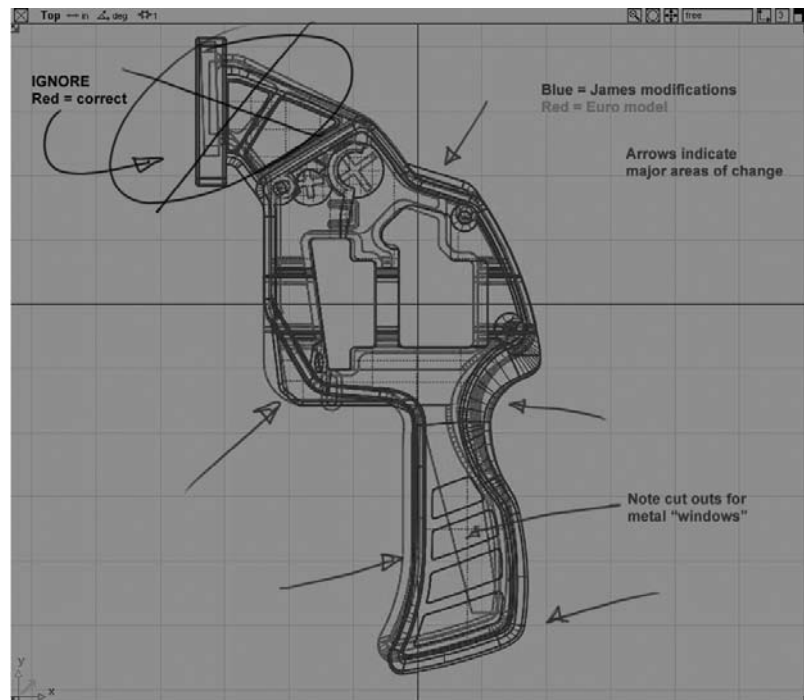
Typical layout drawing. (Reprinted with permission of Irwin Industrial Tools.)
